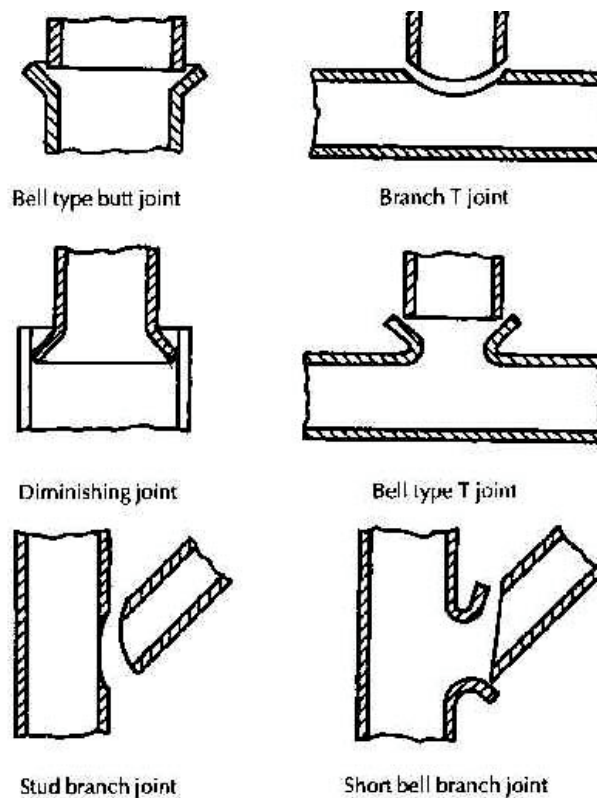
Typical joint designs for bronze welding (tube)
